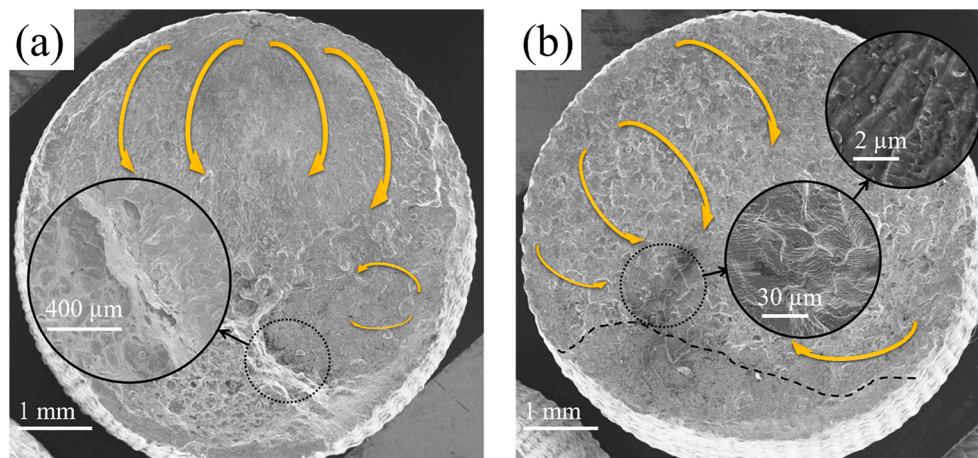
Crack initiation and cracks propagation: (a) fatigue specimen A-05; (b) fatigue specimen A-011.
